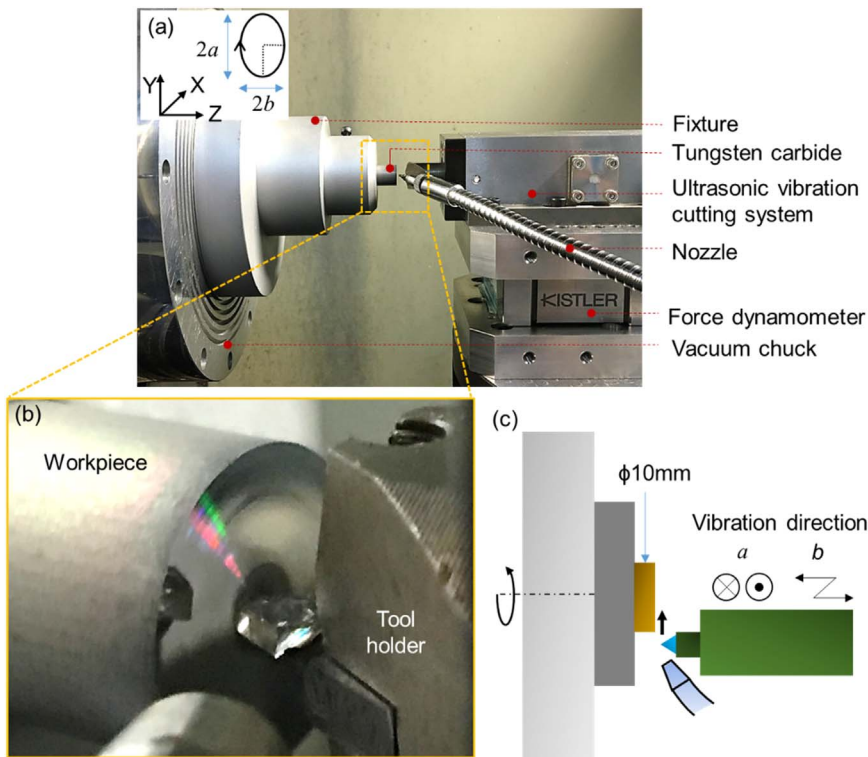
(a) Physical experimental setup for face turning and grooving tests, (b) close-up view the SCD tool and WC workpiece, (c) schematic view of the UVC test.
